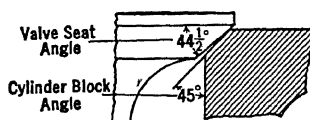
Interference fit between valve face and valve seat face. Unit pressure at point of contact is high, helping to aid sealing and prevent guttering.
